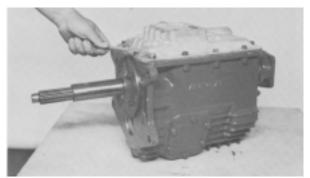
Remove shift lever control top or remote control assembly. Remove control cover capscrews.
